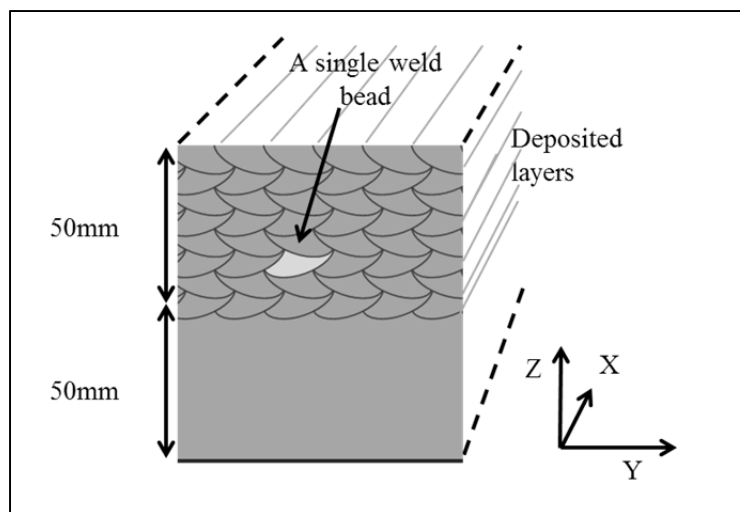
Schematic cross-section of the welded layers.
